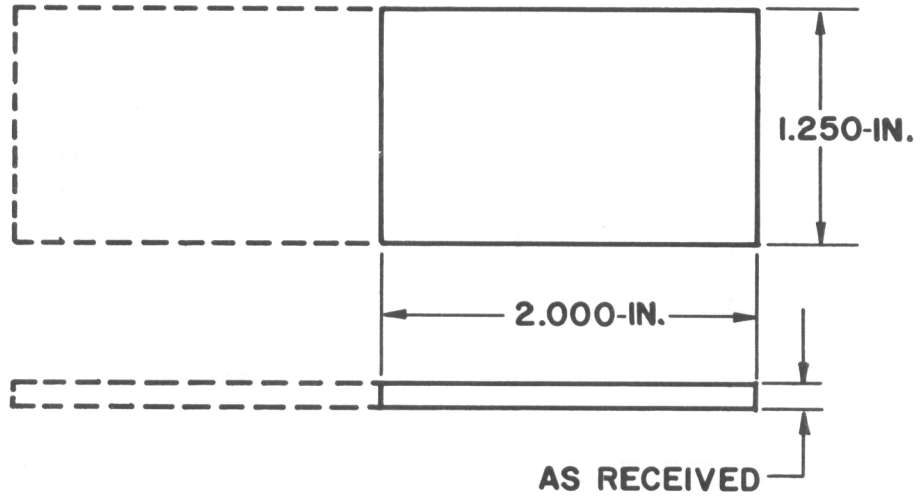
Final Butt-weld Specimen Drawing
